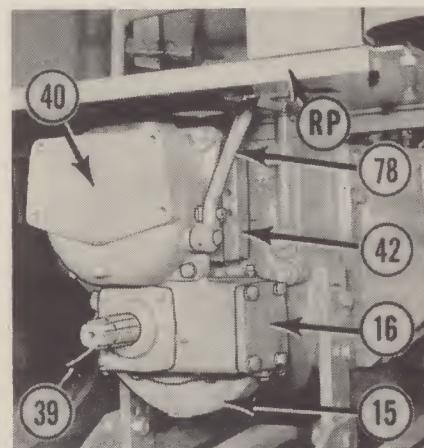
Continuous type pto is mounted on rear face of rear main frame as shown.
